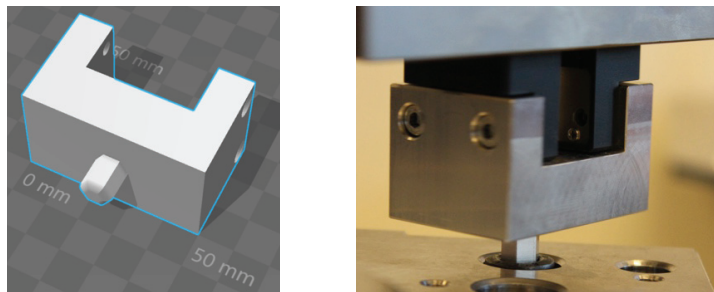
(Left) A CAD-Model of the designed tool; (Right) The end result of the manufactured tool.
